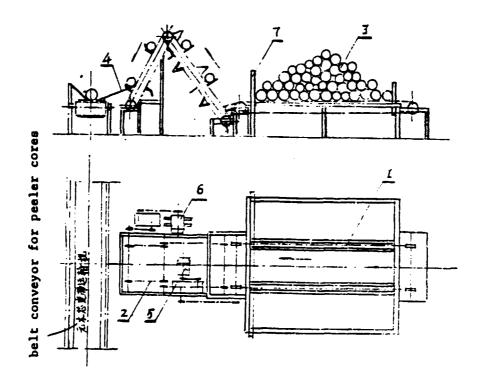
Schematic drawing of a feed conveyor for peeler cores
